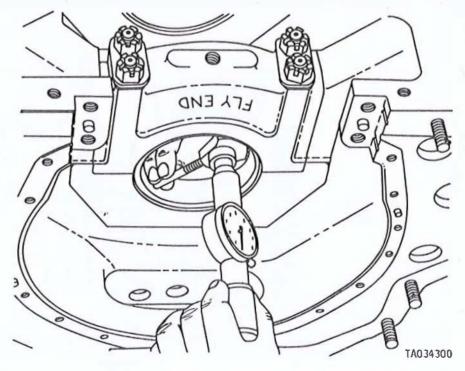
Checking inside diameter of main and main thrust bearings.
